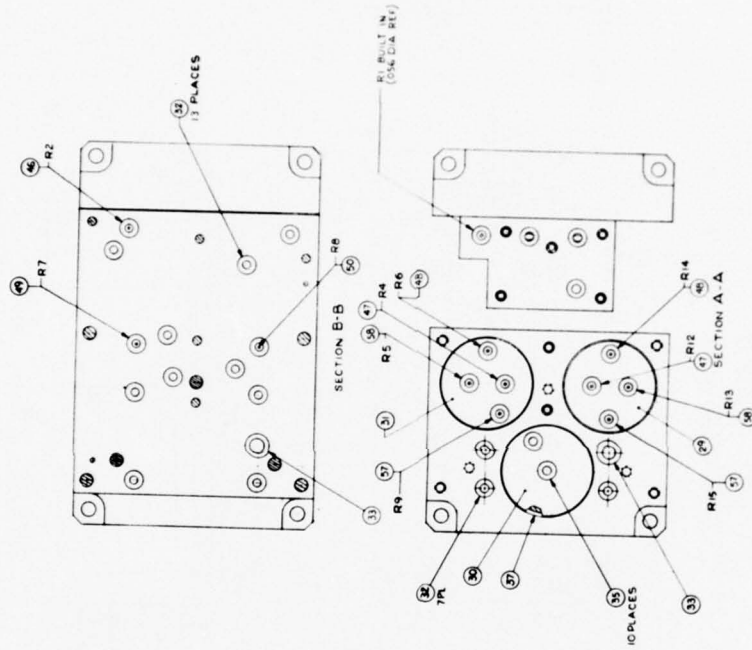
YG1136A Roll Axis Controller Assembly Drawing (Concluded).
